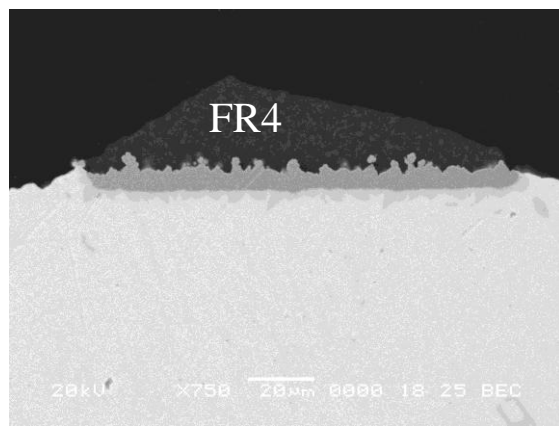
Example of pad cratering in underlying FR4 material after shock test
